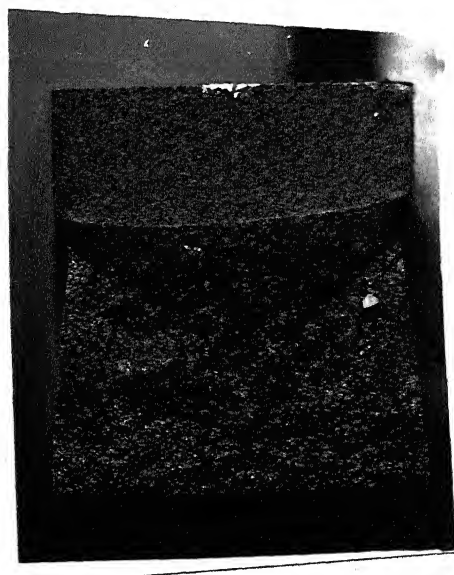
Photographs showing fractured surfaces of 0.6% carbon steel specimens.
